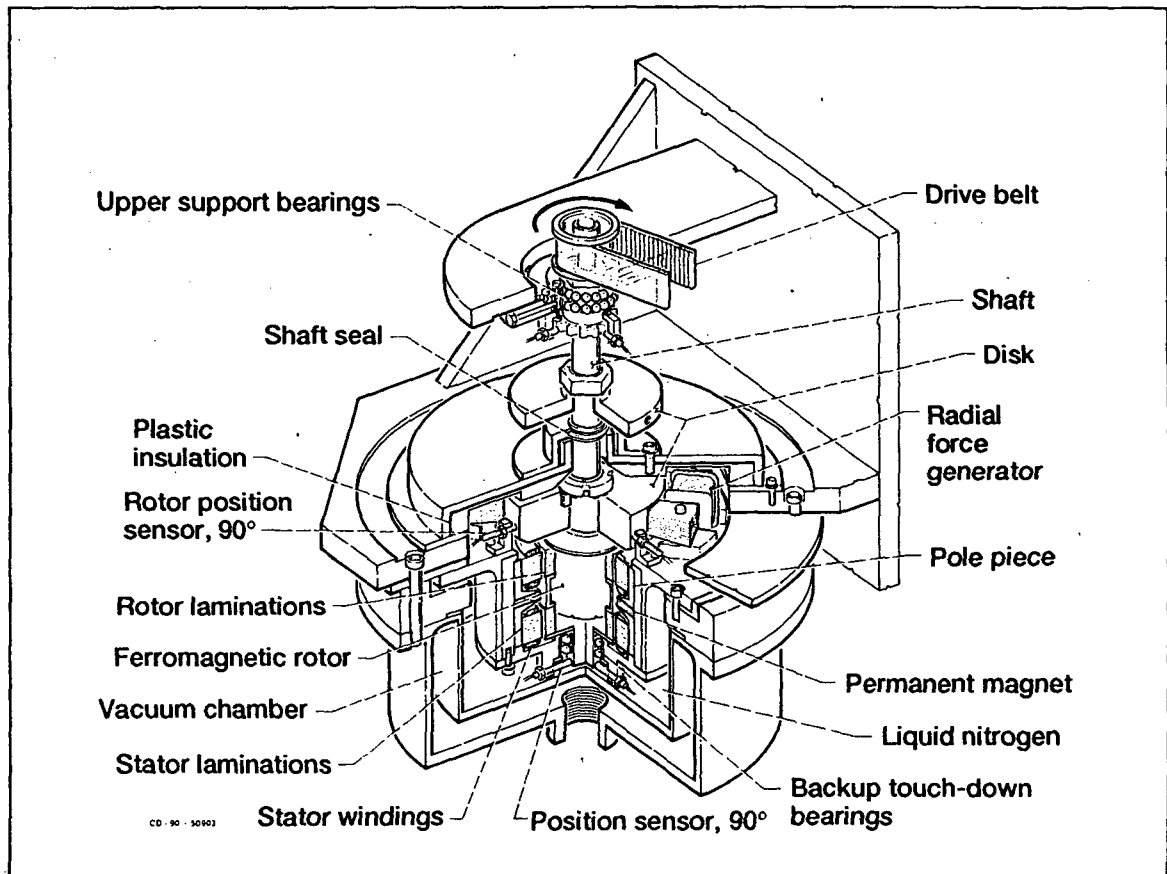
Cryogenic hybrid magnetic bearing and test rig.
